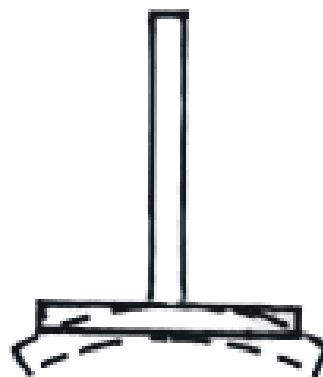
Pre-bent shape (shown dotted) to get proper shape (shown solid) of bottom flange
